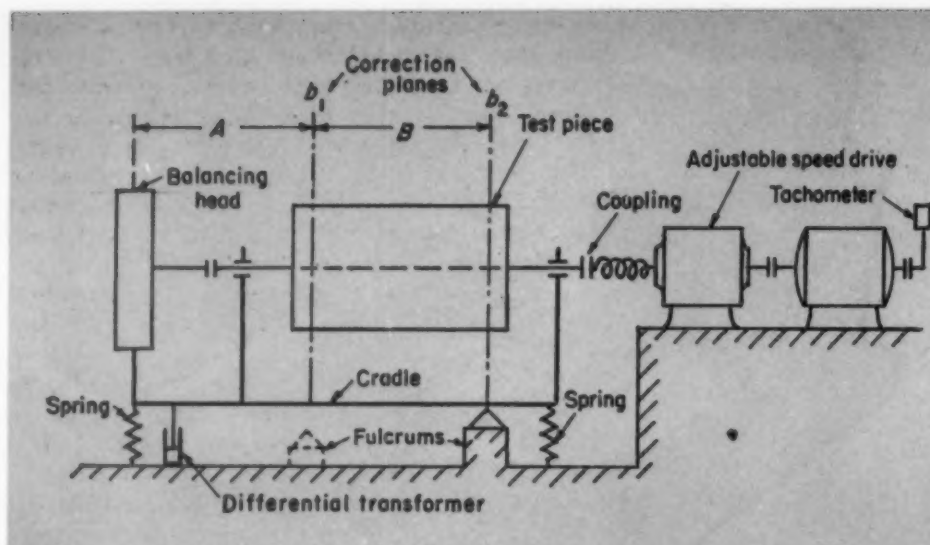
General setup of balancing machine is shown in this schematic drawing
